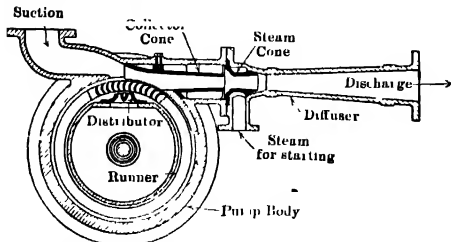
Section through a Westinghouse-Leblanc Air Pump.
